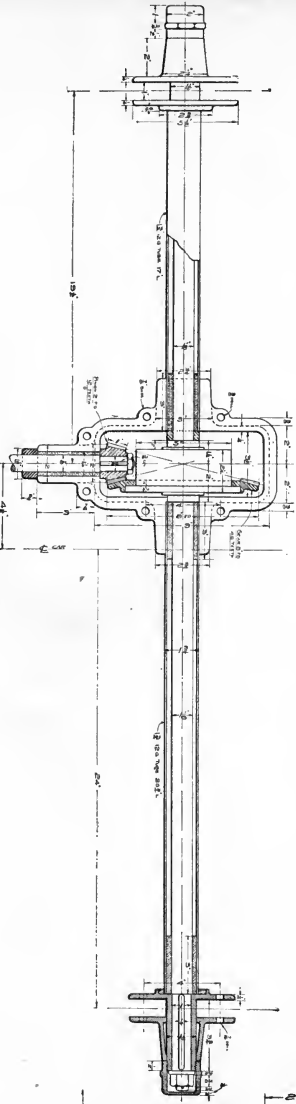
DETAILS OF REAR AXLE AND BEVEL GEAR.
